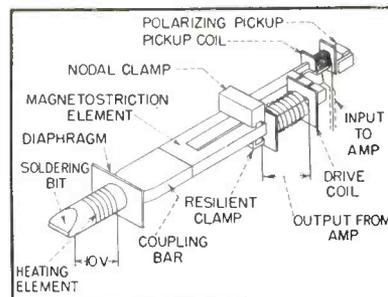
Sketch of the main components of the ultrasonic soldering iron
